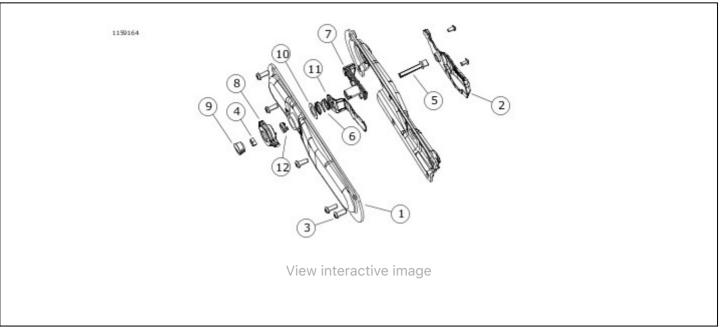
Kit Contents: Saddlebag Latch Assembly Table 3. Kit Contents: Saddlebag Latch Assembly
